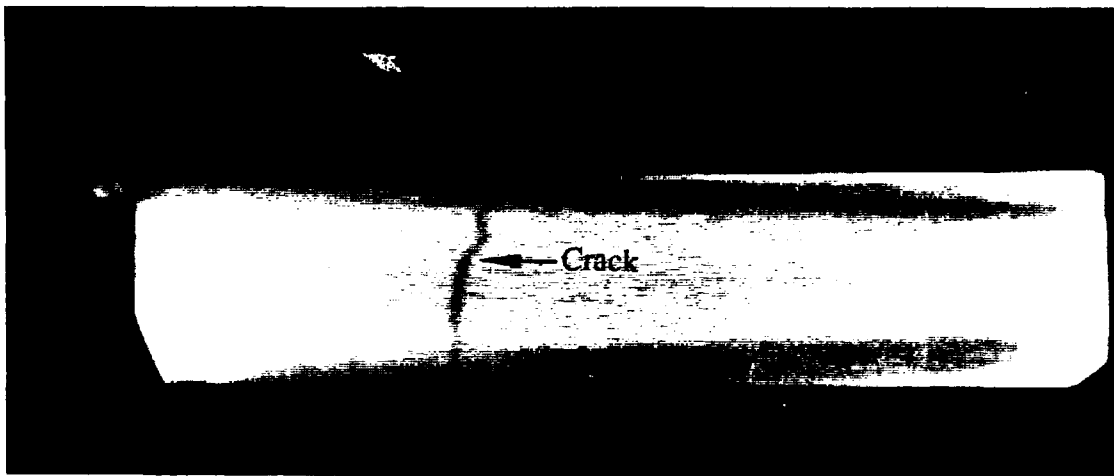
CT image showing crack in an aluminum forging.
